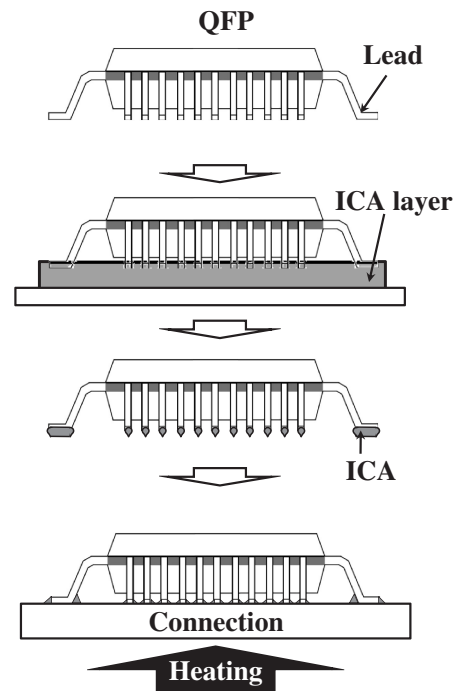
A schematic of hybrid interconnection process using solderable ICA and QFP package.
